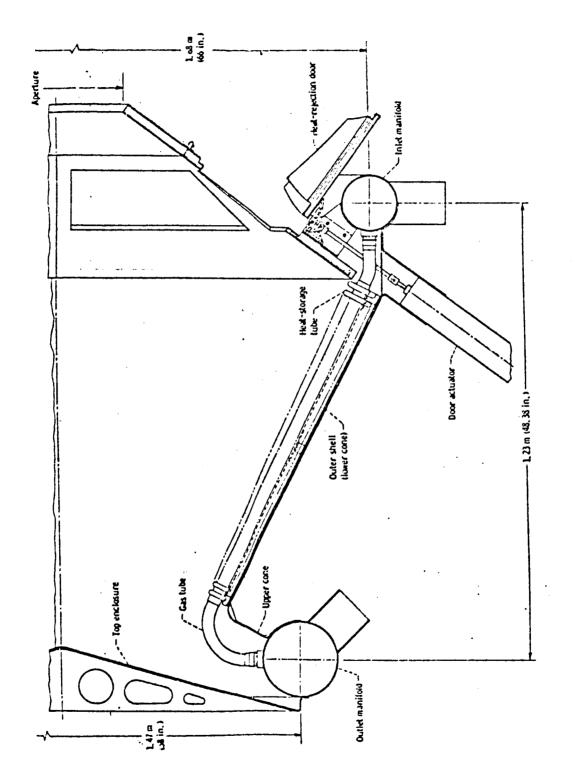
EXPLODED VIEW OF A BRAYTON RECEIVER [1]
